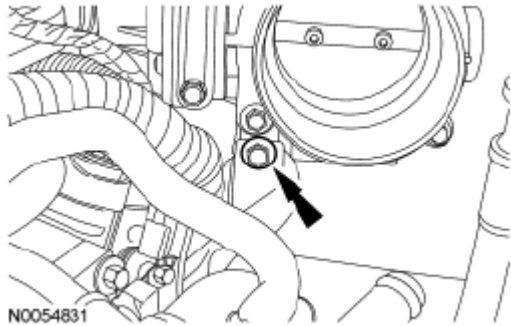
Locating Upper Intake Manifold Support Bracket Bolt
